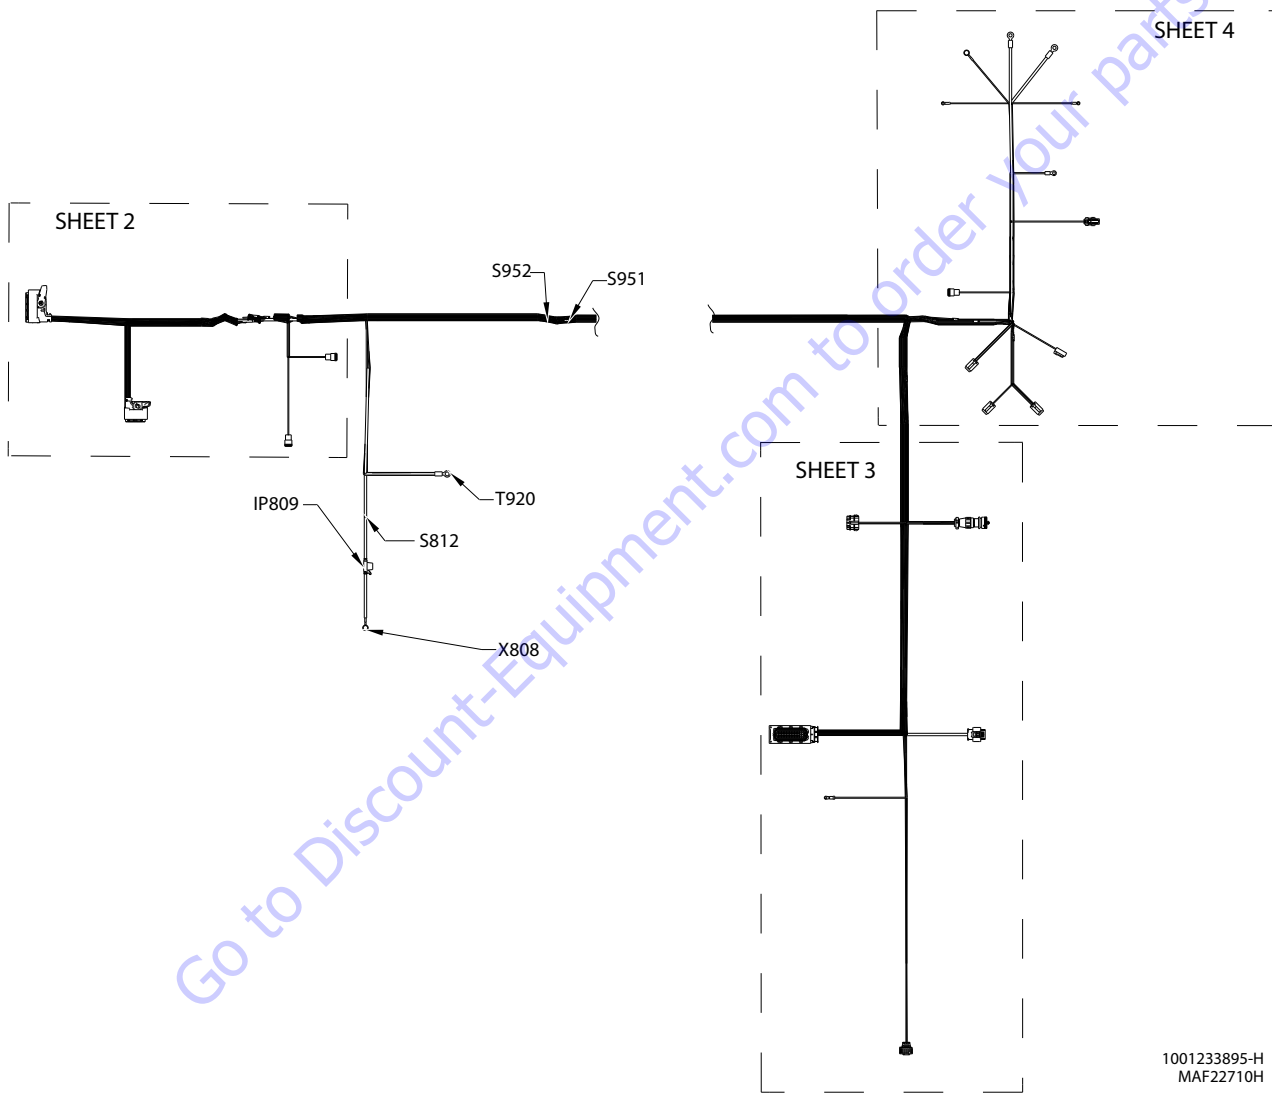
Deutz T4F Engine Harness - Sheet 1 of 5
